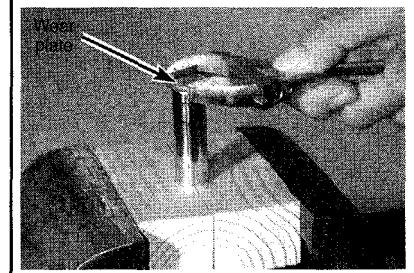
Remove the wear plate from the end of the rod and slide the end cap off the rod.
